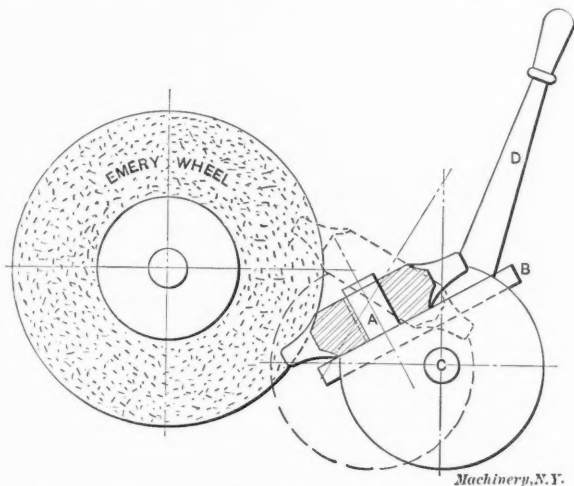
Adjustment of Table, permitting Grinding the Sides of Large Cutters
